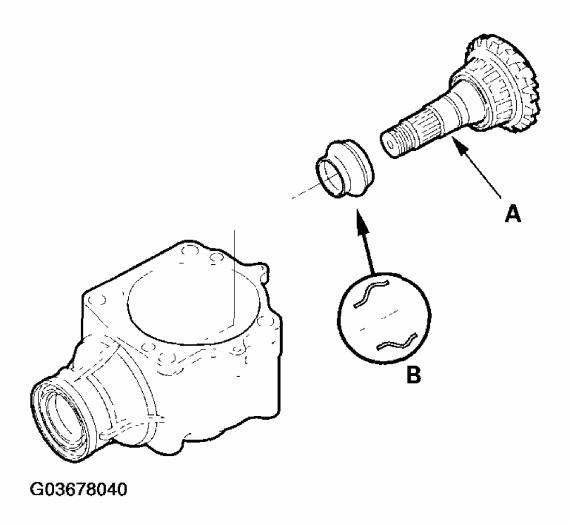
Removing Transfer Driven Gear, Transfer Spacer From Transfer Driven Gear
